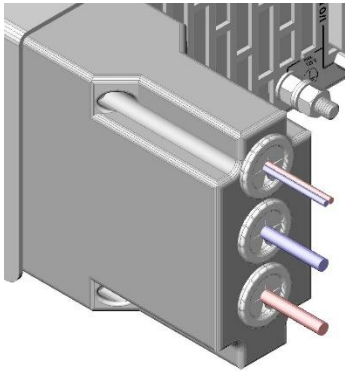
fully assembled safety cover SAB-HES-2PK/SB
